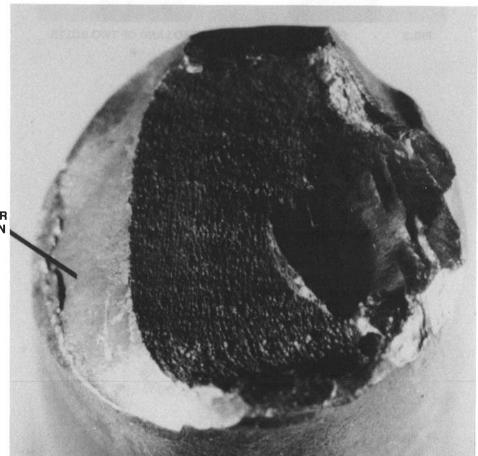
FRACTURE OF NO.2 UPPER BOLT
